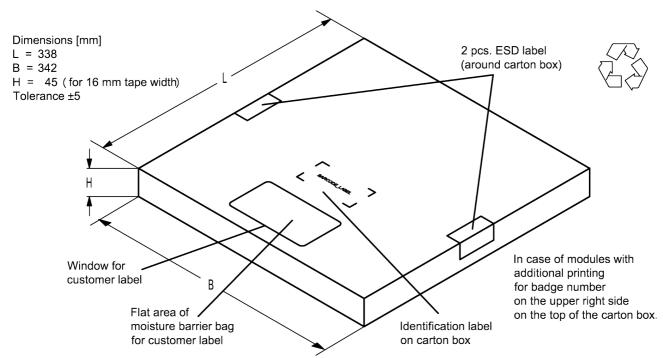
Drawing of folding box for reel with diameter of 330 mm.
